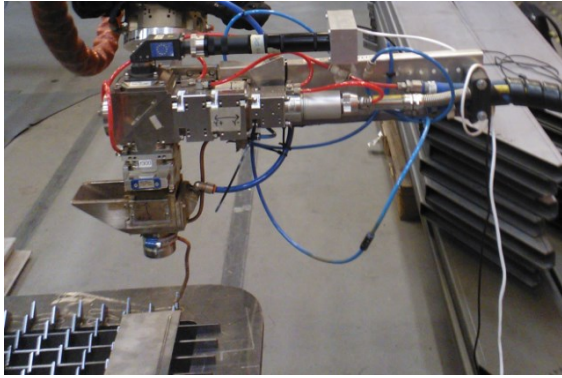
The laser welding test setup. The camera is attached to the welding head (from Precitec) through a 90 degree mirror and focusing lens. The fibre laser is brought from a collimator through 90 degree mirror optics to the work piece. The focal position of the laser was -4mm (below the surface).
